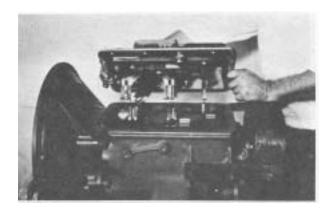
Remove control cover assembly from transmission. Remove backup switch.
